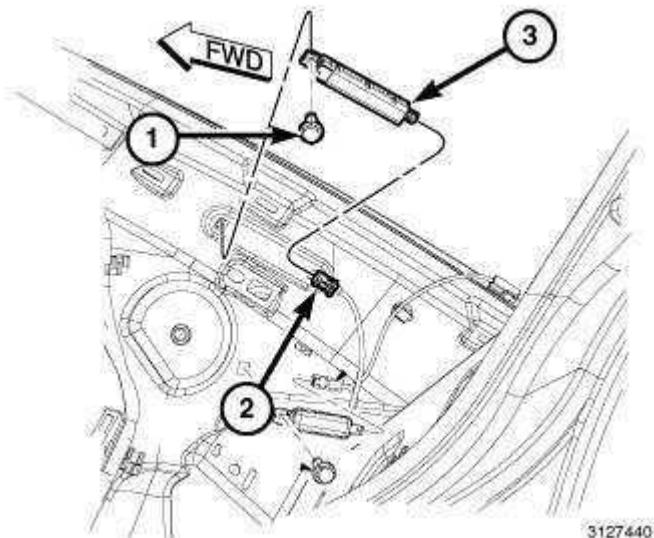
Antenna Cable, Mounting Fasteners And Antenna Module
